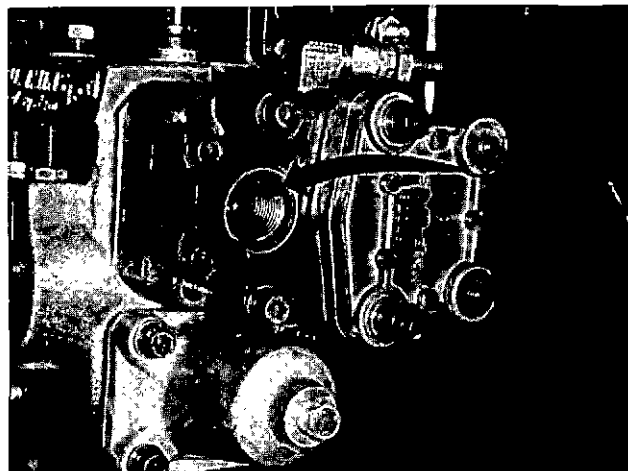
, (F5243). Fuel inlet connection on the gear pump
